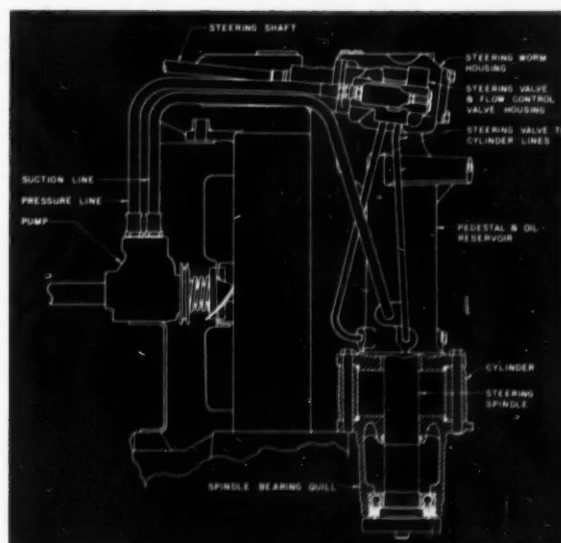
The John Deere power steering system is composed of steering cylinder, hydraulic pump, oil reservoir, steering valve, flow control valve, and connecting lines
